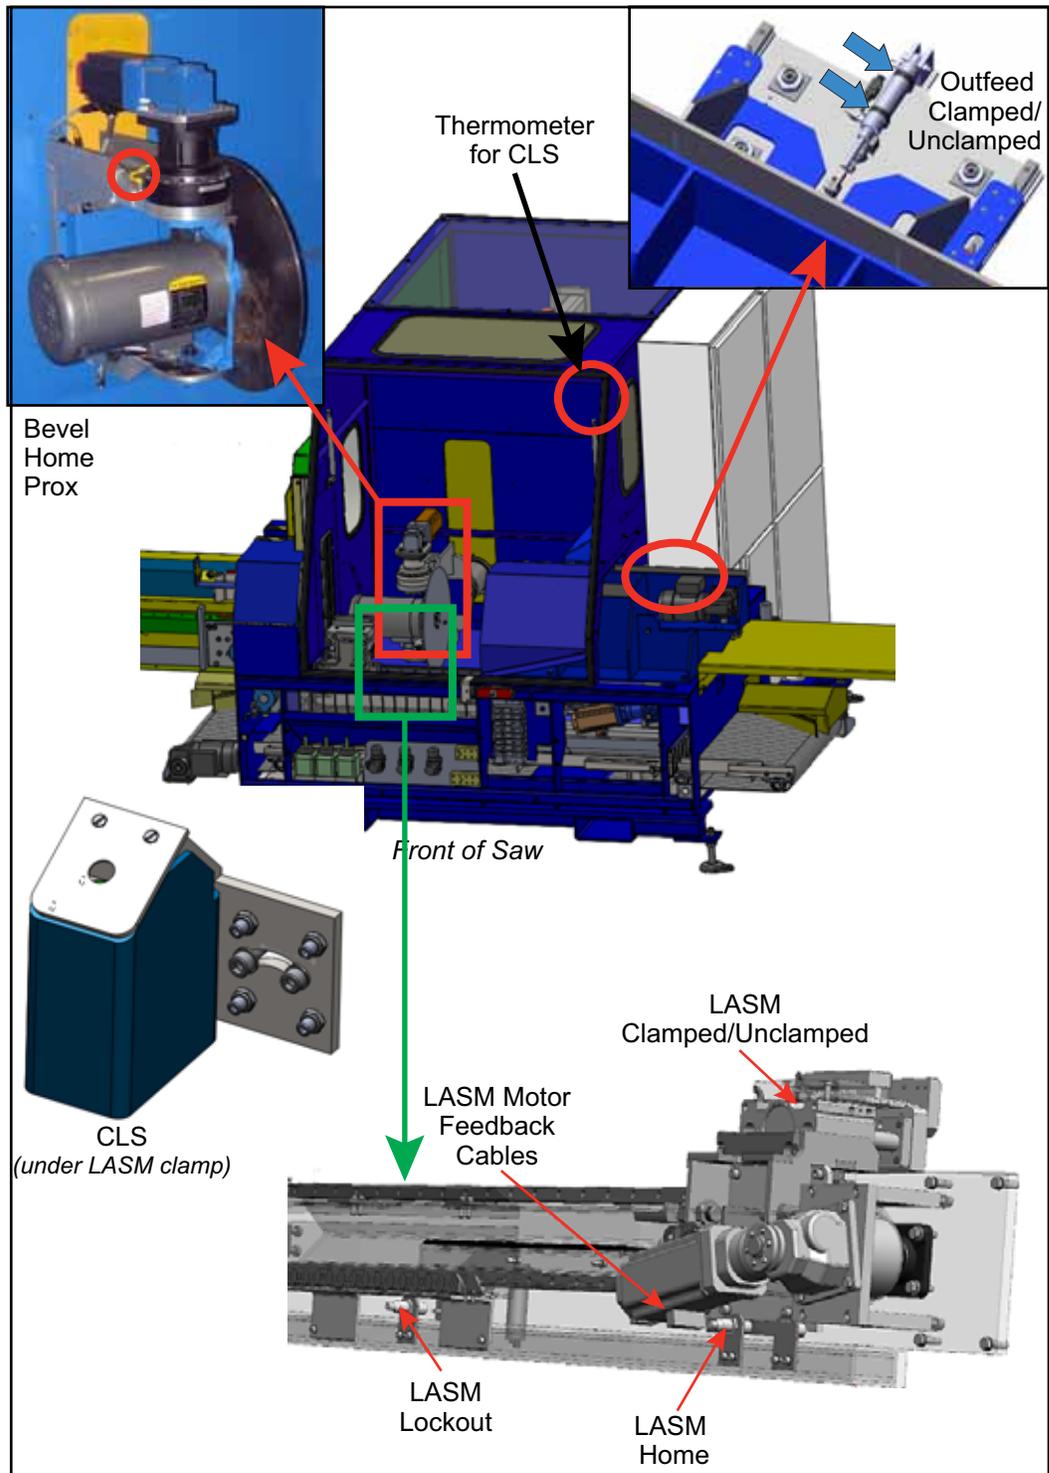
LASM Clamp/Unclamp Sensors (Extend/Retract)
